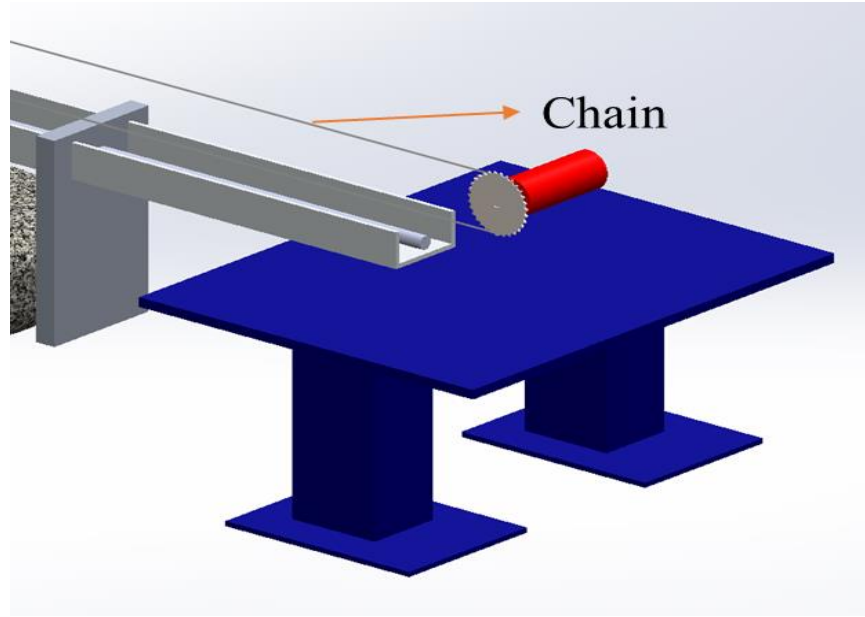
Chain and two motors mechanism. The motor rotates the sprocket. The sprocket runs the chain loop and consequently moves the part that pushes the curling stone. The Red cylinder is the main actuator / motor.
